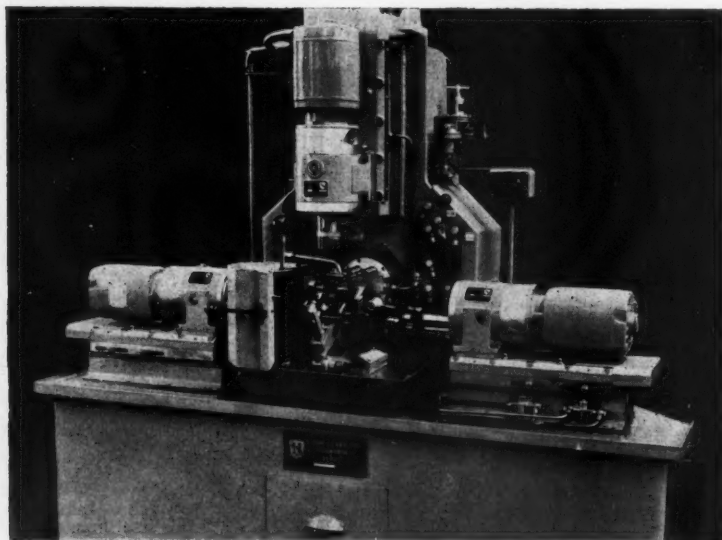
Four unit heads are incorporated in this machine for drilling and spot-facing a light-alloy ball component for a vacuum cleaner
